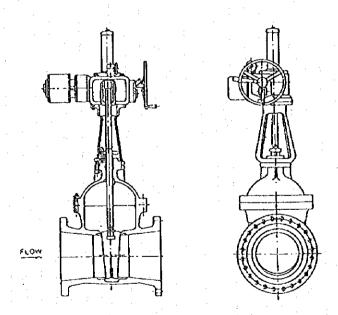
OUTLINE OF FLANGE AND MOTOR DRIVEN TYPE GATE VALVE
